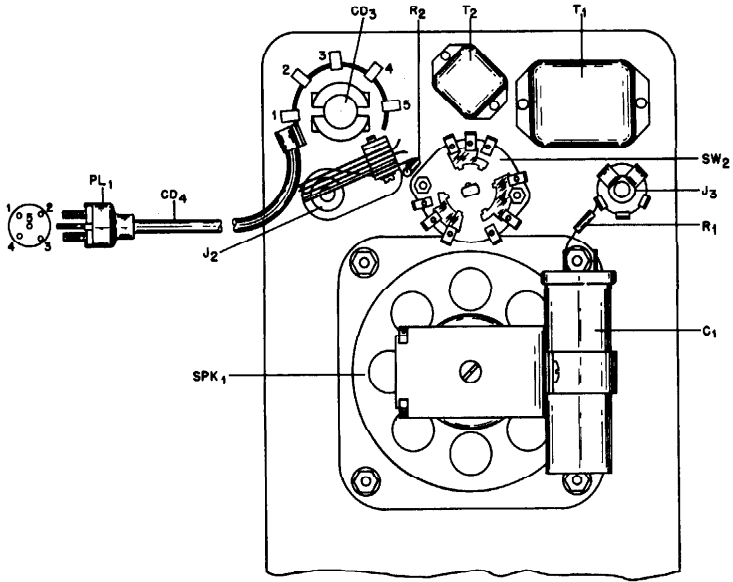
Power Supply Unit PE-157-(\*), Interior View of Housing Cover Showing Major Parts
